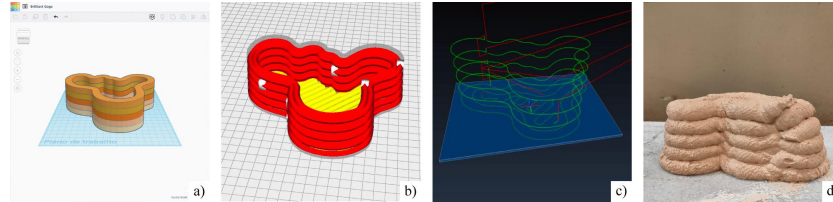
Procedure performed during 3DP stage: a) Tinkercad modelling; b) slicing in Ultimaker Cura software; c) g-code edition assisted by CAMotics; and d) final printed part.
